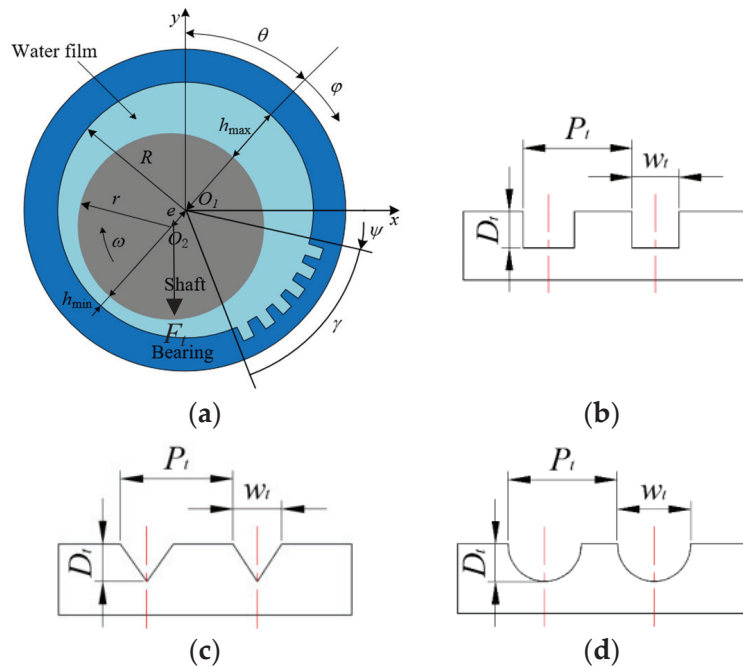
Lubrication model of micro-groove stern tube bearing. (a) Schematic diagram of micro-groove stern tube bearing structure; (b) rectangular structure of micro-grooves; (c) triangle structure of micro-grooves; (d) semi-circular structure of micro-grooves. Adapted from [15].
